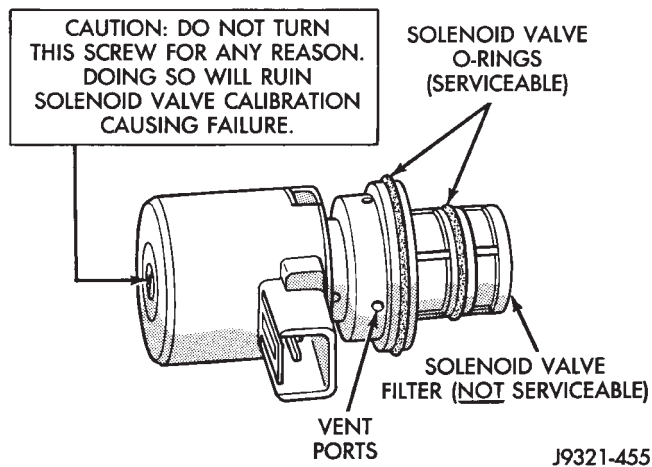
Governor Pressure Solenoid Valve O-Ring And Vent Location
